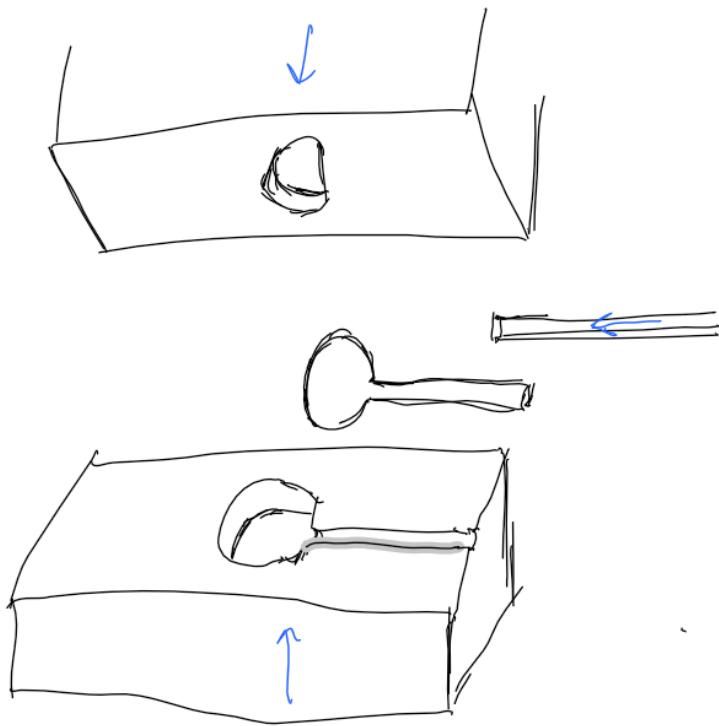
Mold for injection molding the cap, with blue arrows indicating the movements of each part of the mold.
